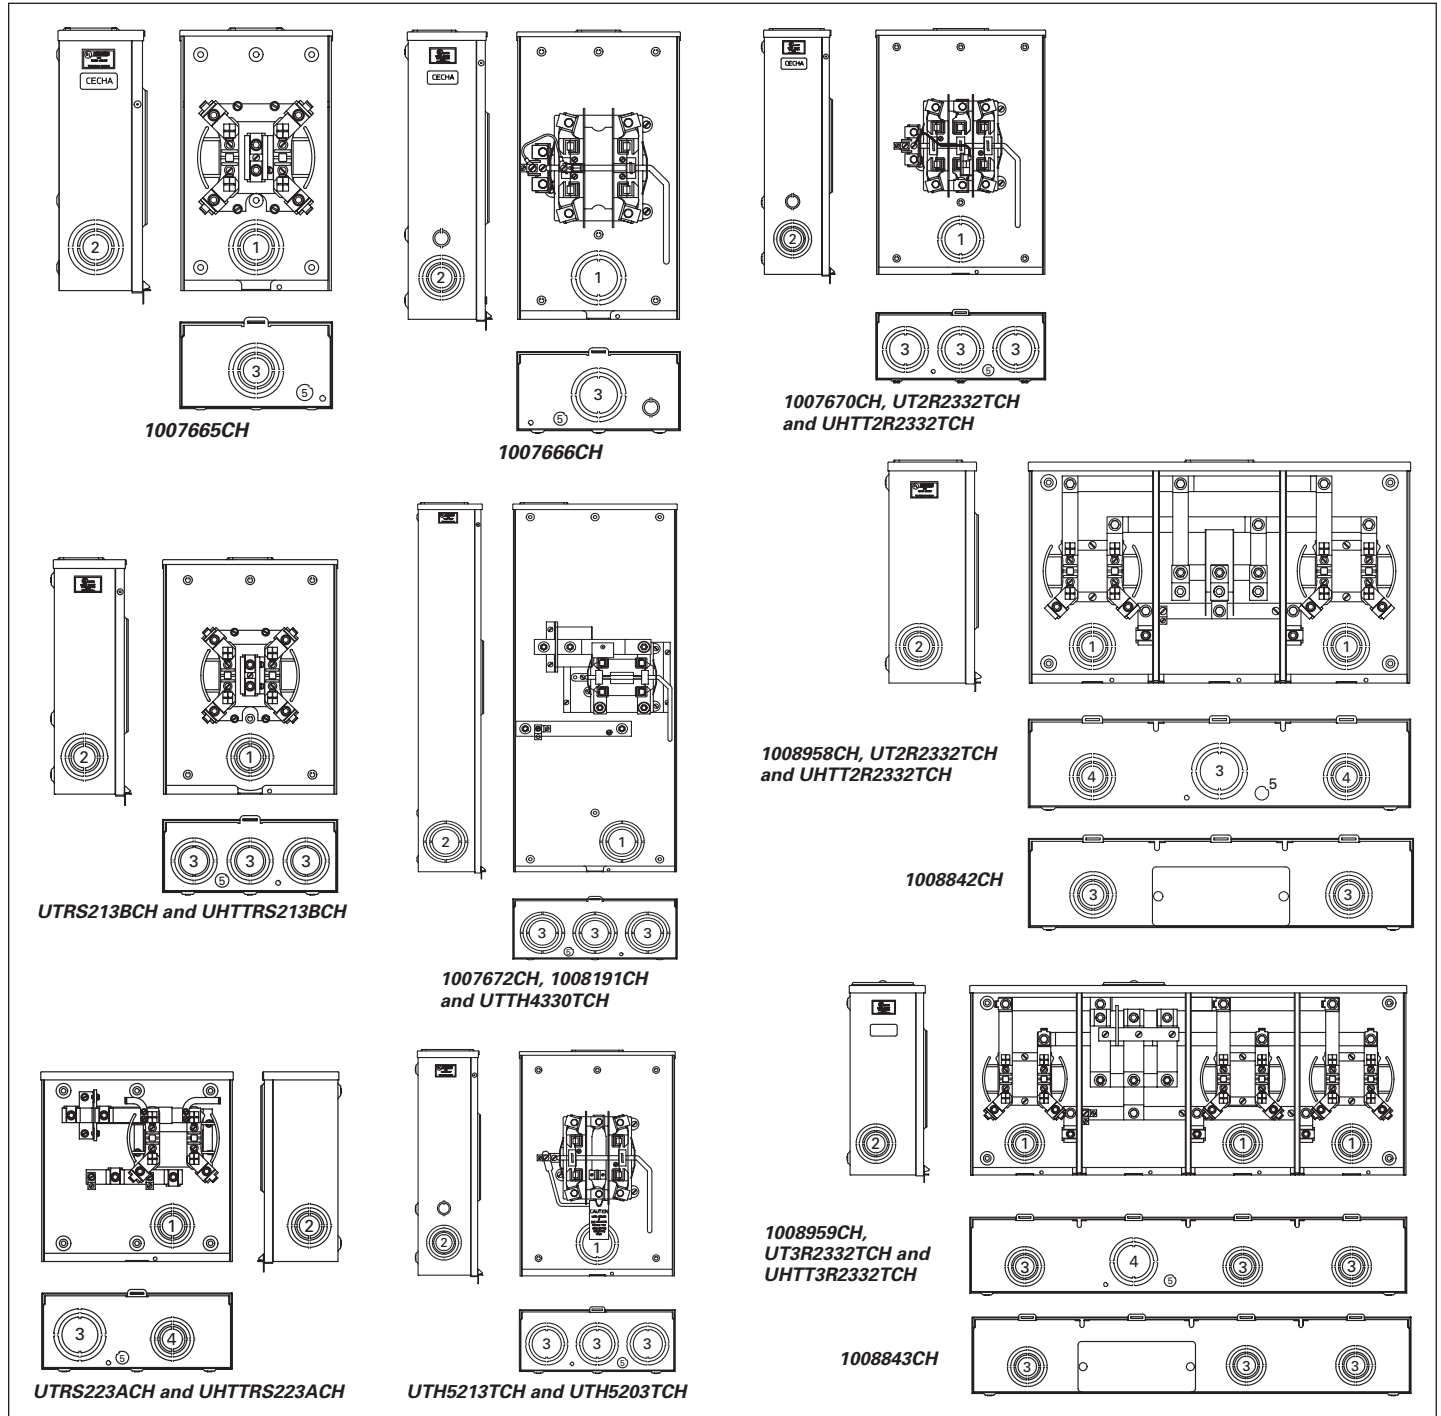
KNOCKOUT DRAWINGS — DRAWINGS NOT TO SCALE
